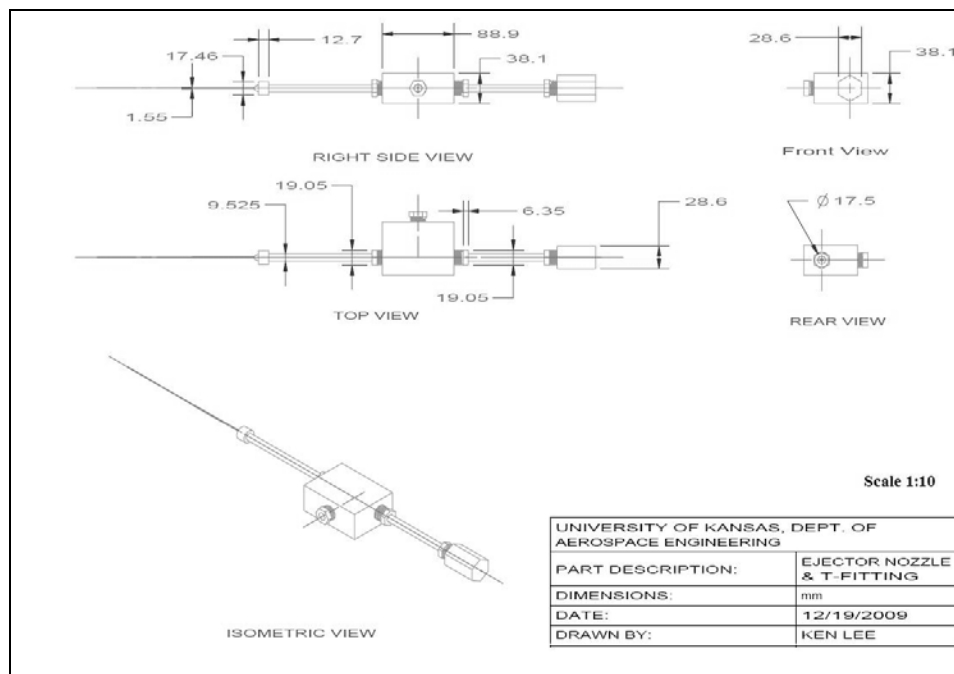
CAD Diagram of the Ejector Nozzle and T-Fitting Assembly Drafted in UG NX 6.0.
